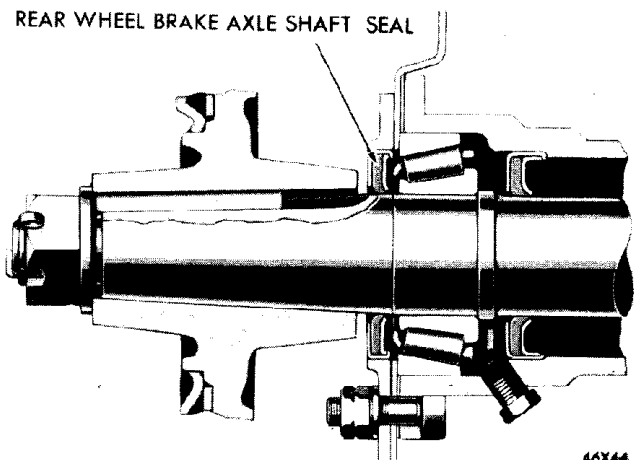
Rear Wheel Bearing Outer Oil Seal
